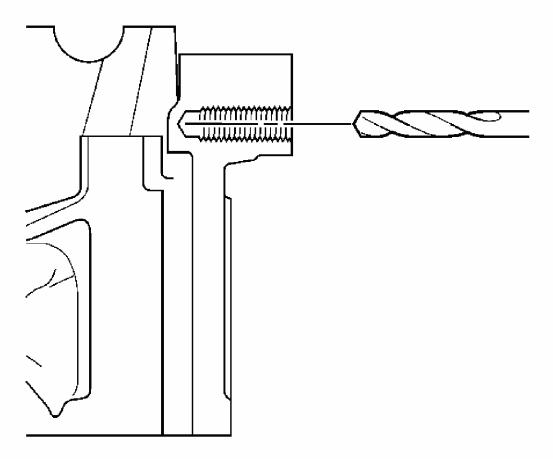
Drilled Hole Centerline Courtesy of GENERAL MOTORS CORP.
